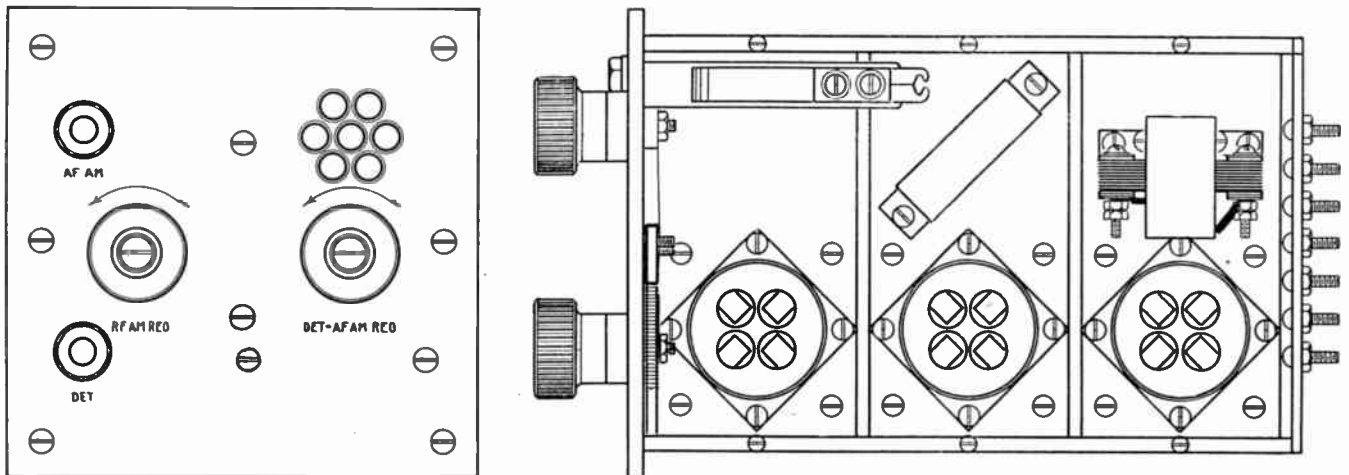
Front and top views of the unit, showing the parts mounted on individual plates
